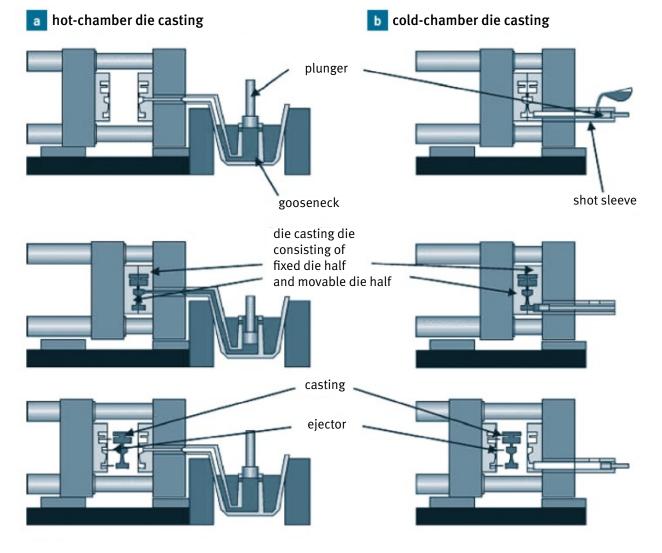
Schematic representation of the course of the die casting process: (a) hot chamber die casting machine, (b) cold chamber die casting machine
